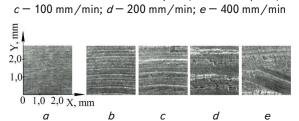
Microphotographs of the surface of plates made of alloy D16T after face milling (n=125 r/min, t=1 mm) at different values of S feed: a - 25 mm/min; b - 50 mm/min; c - 100 mm/min; d - 200 mm/min; e - 400 mm/min
